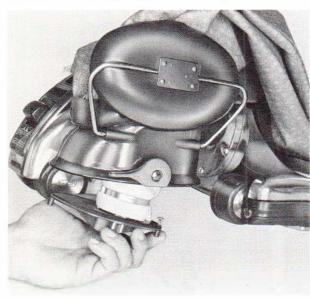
Filler tube and adapter cover through bottom of Sani-Em-Tor body
